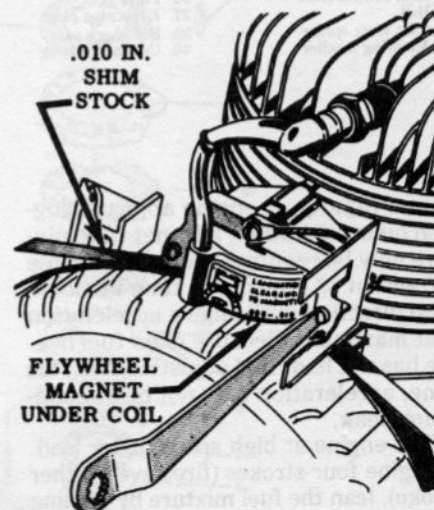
Recommended magneto air gap is obtained by shifting coil on mounting screws.
